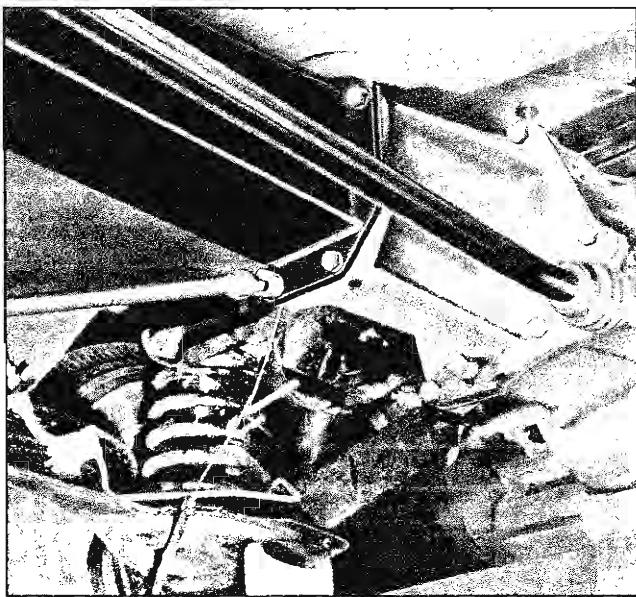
Removing Bolts Connecting Torque Tube to Transmission
